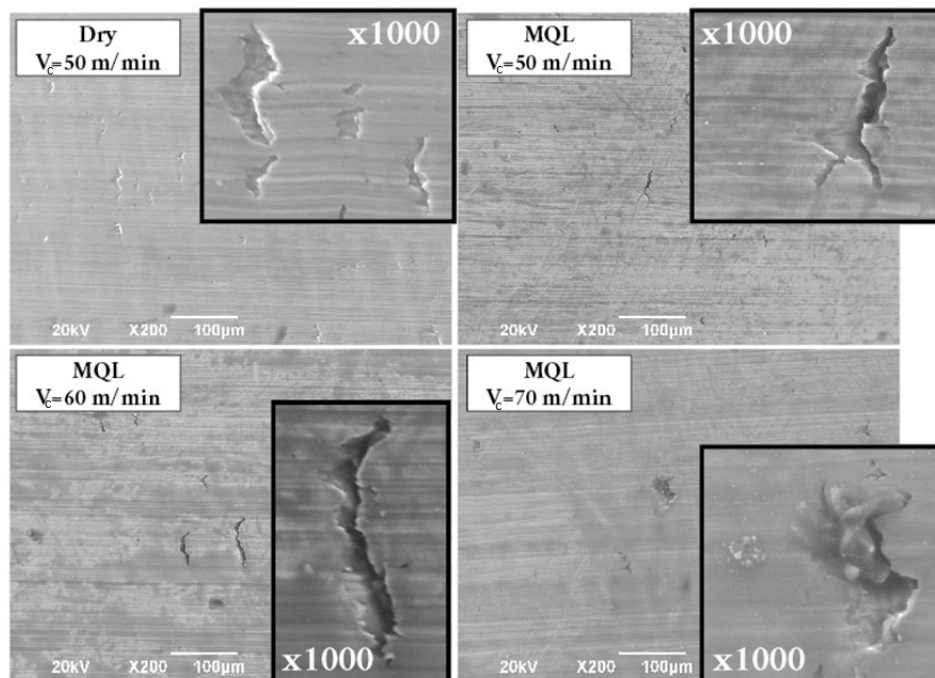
Surface morphology of the machined workpieces ($f = 0.1$ mm/rev and $a_p = 0.25$ mm).
